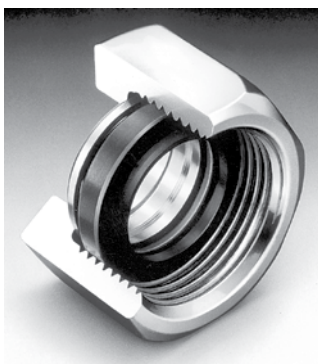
The unique Functional Nut allows easy handling and quick assembly.
